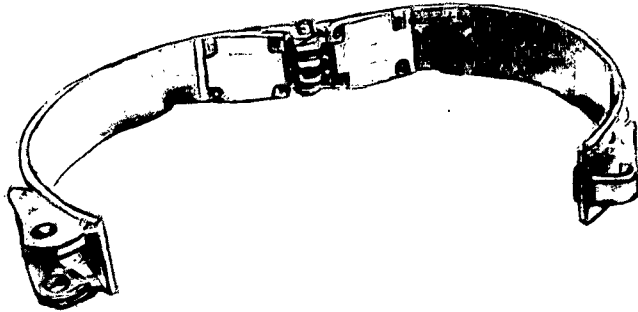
Worn brake lining removed from RN 110D-2 carrier.
